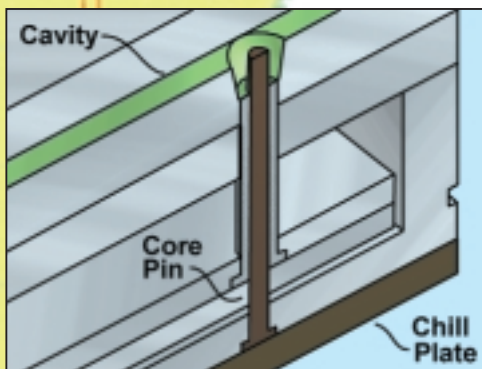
Illustration A: Core pin forming a hole in the plastic part. The core pin transfers heat to a chill plate for faster cooling cycles.
